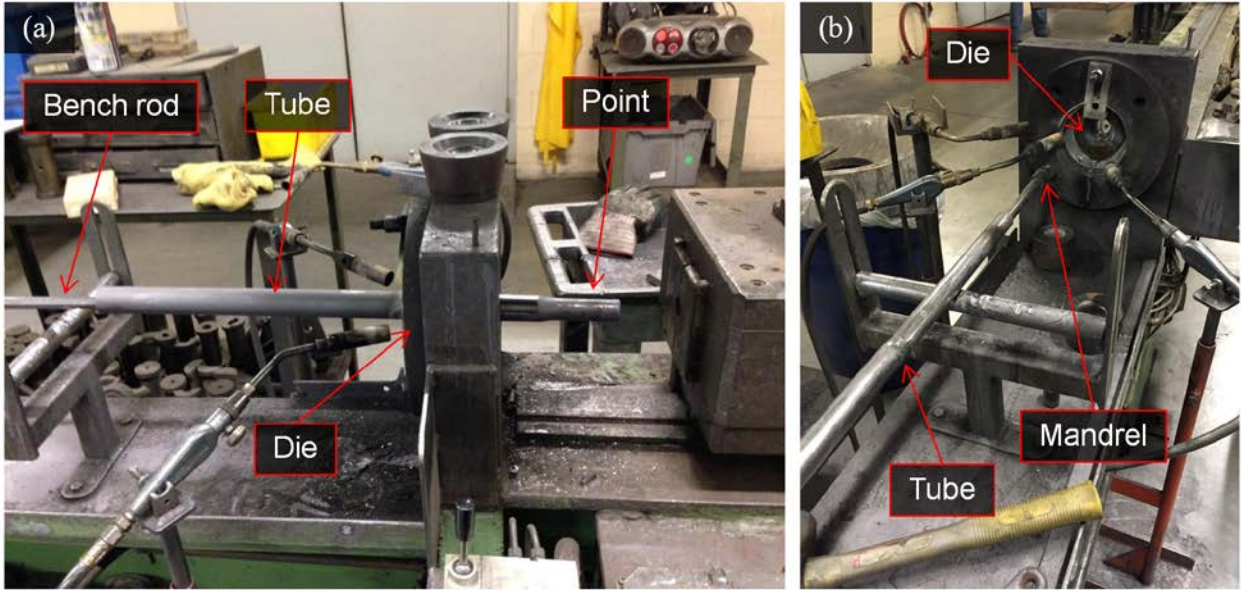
Apparatus of tube drawing at Rhenium Alloys, Inc.; (a) a side view and (b) a rear view.
